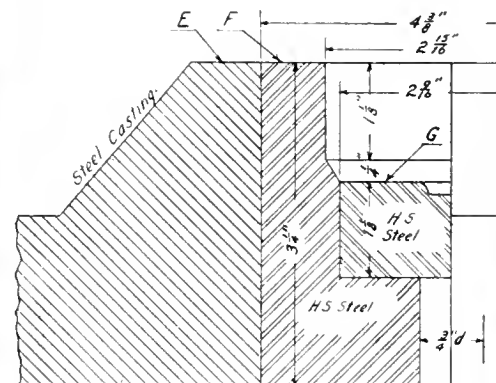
DIE FOR FORGING BRASS SOCKETS.
